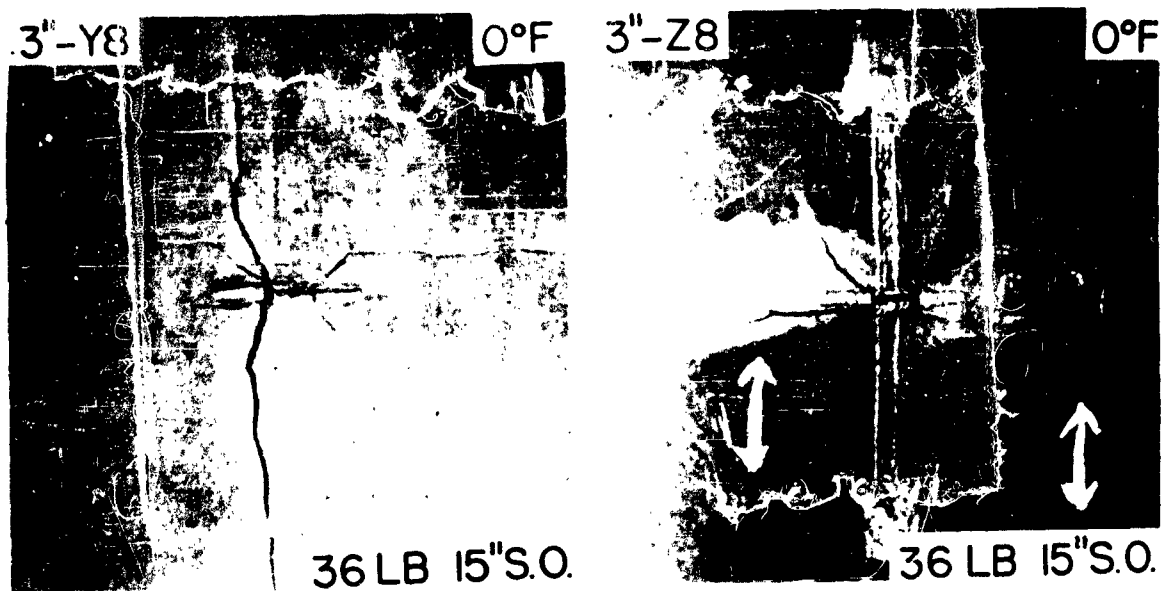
Duplicate 3-in. thick crack-starter explosion-bulge test plates. Failure again is by brittle fracture.
